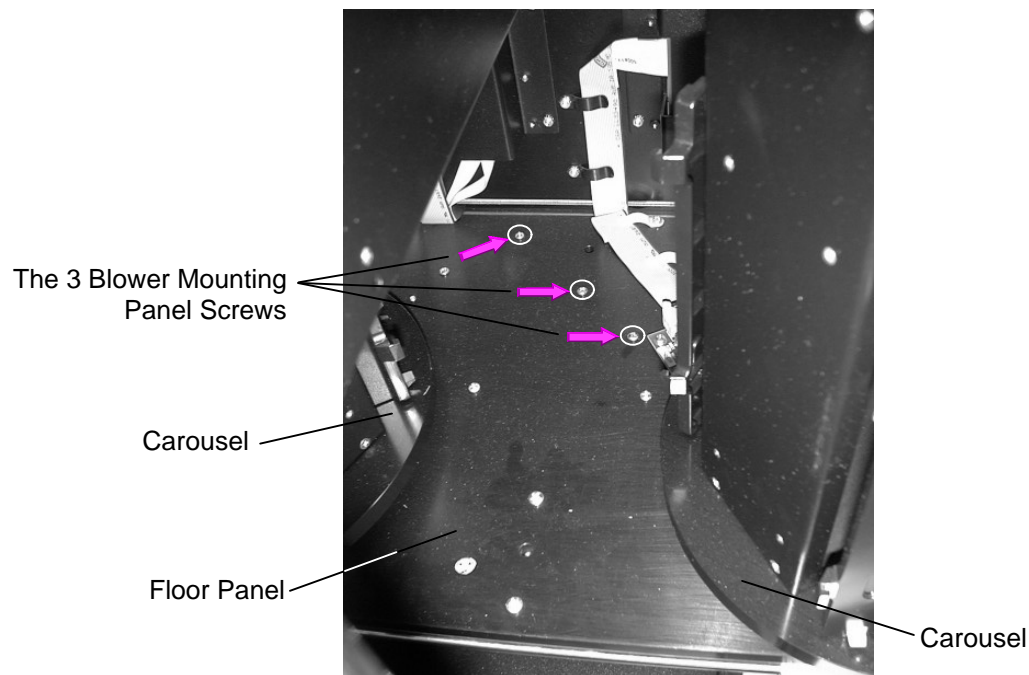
Blower Mounting Panel Screws as seen on the Floor Panel
